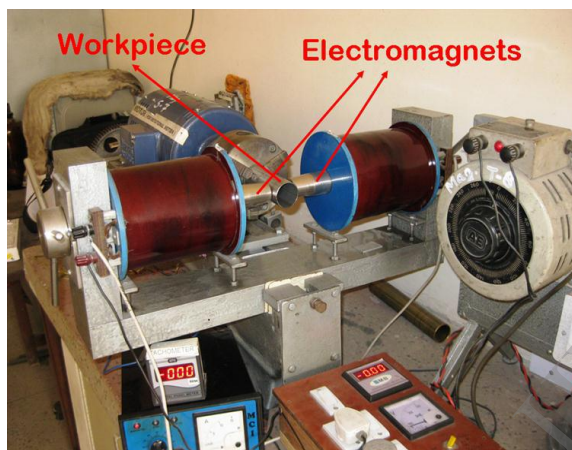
Cylindrical work piece machining on magnetic abrasive finishing machine[1]
